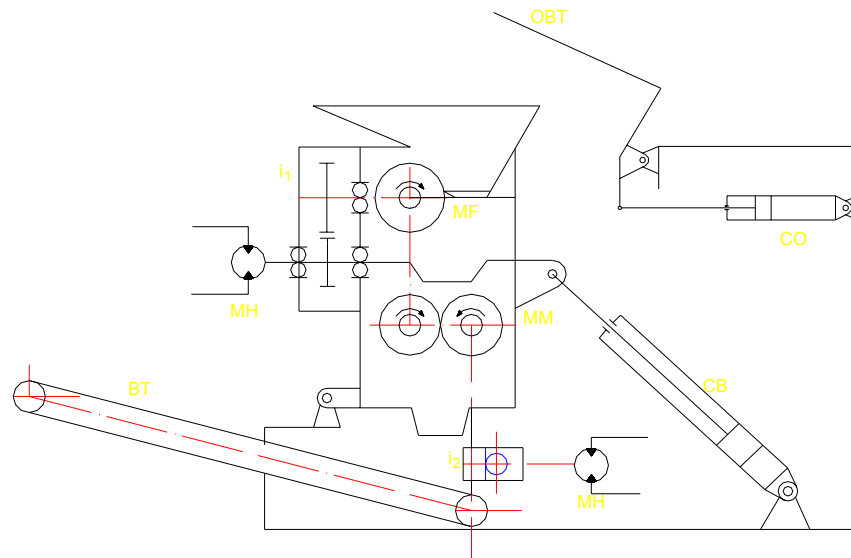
The kinematic device of equipment for breaking-up and crumbling
